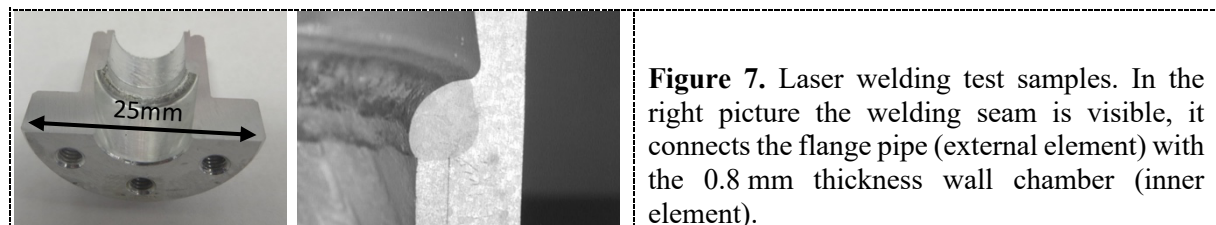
Laser welding test samples. In the right picture the welding seam is visible, it connects the flange pipe (external element) with the 0.8 mm thickness wall chamber (inner element).
